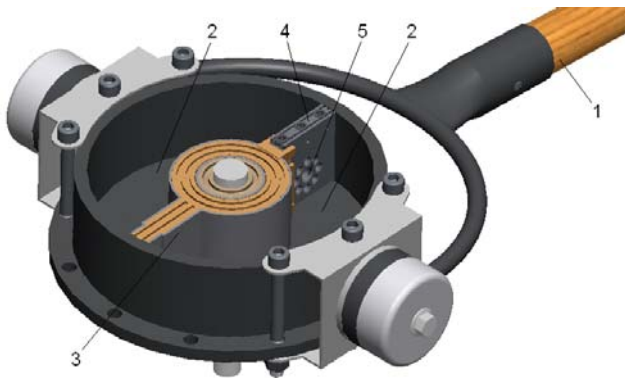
Loading unit of the rowing machine: 1 - oar handle; 2 - chambers; 3 - immobile plate; 4 - moving plate (diaphragm); 5 - channel
